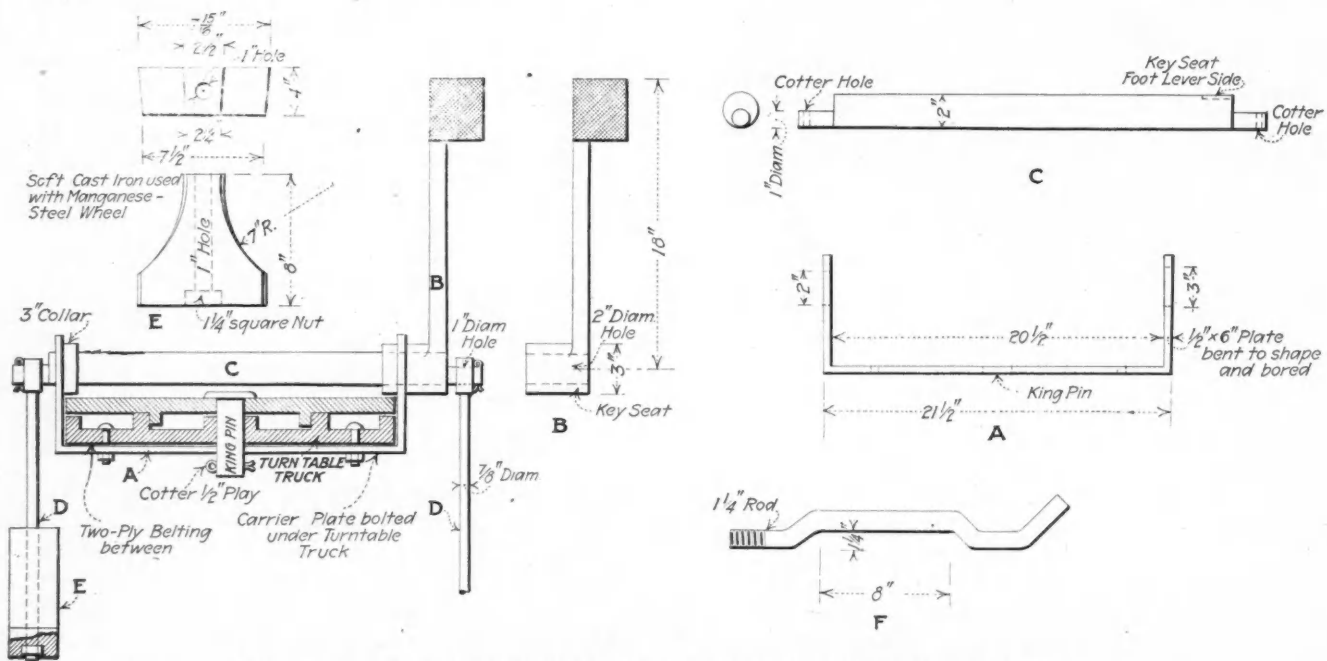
DETAILS OF SPECIALLY DESIGNED BRAKE FOR HECLA ORE CAR
